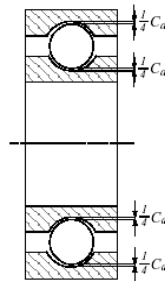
Wear (Clearance/gap,  $C_d$ ) in ball bearings [2].
